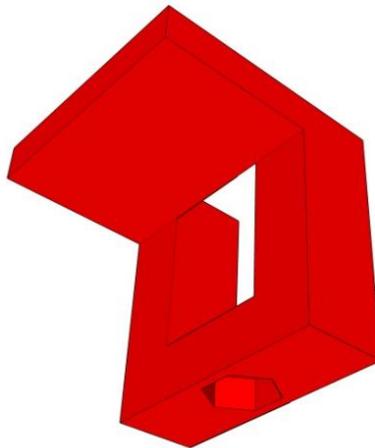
3D-printed nut holder to assist with fence removal and replacement
